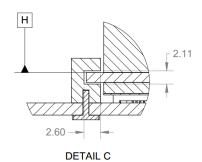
Small Form Factor Baseboard Chassis CTF Dimensions (Rail Guide Detail) – Detail C
